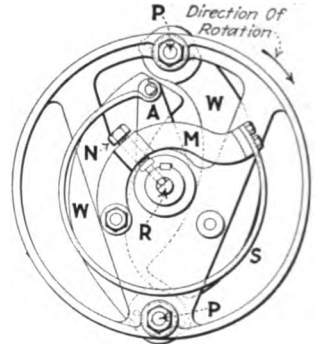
Hamilton uniflow-engine governor showing screw for spring-tension speed adjustment.
